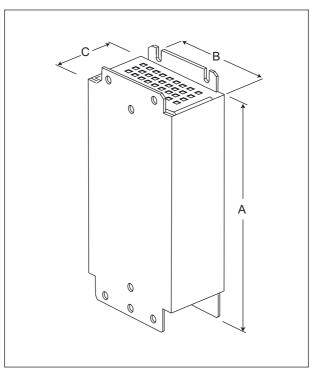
Dimension drawing: Motor reactor, frame size FSA
